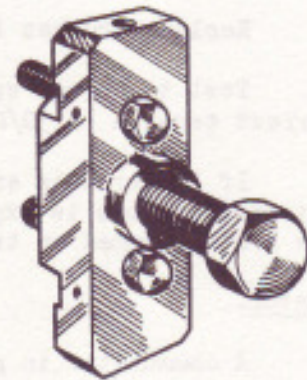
UNIVERSAL EXTRACTOR. TOOL NO. STD. 505.
